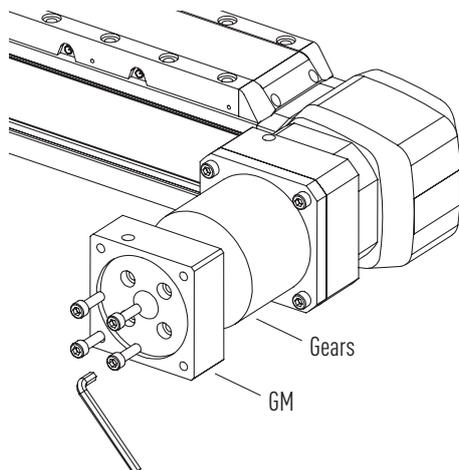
Mounting the motor gear adapter plate GM (HM-B)
